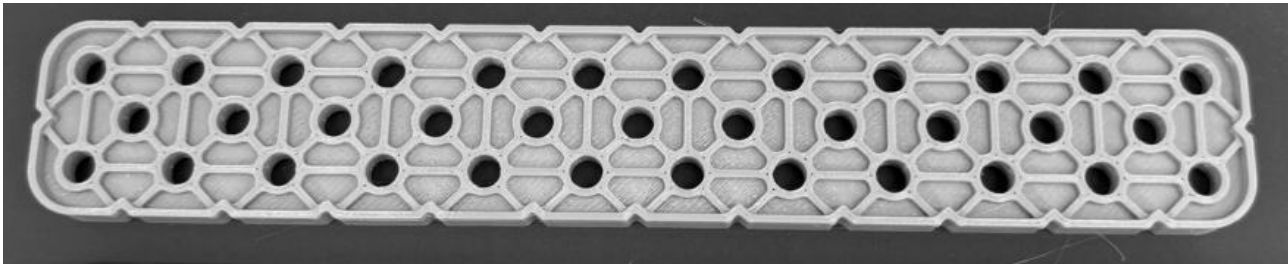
Printed structural element 2x12 Beam (228-2500-026) VEX – material used: PETG
